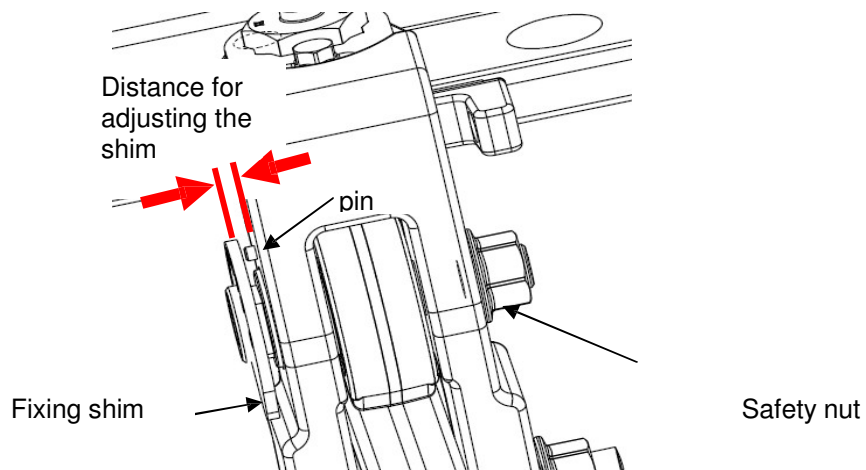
Release of the eccentric bolt for adjustment of clamp length
